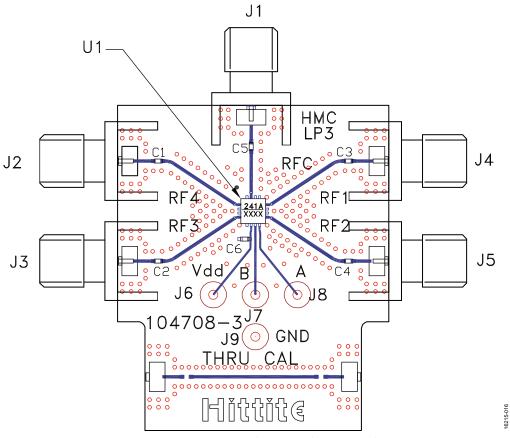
108333-HMC241ALP3 Evaluation Board Component Placement
